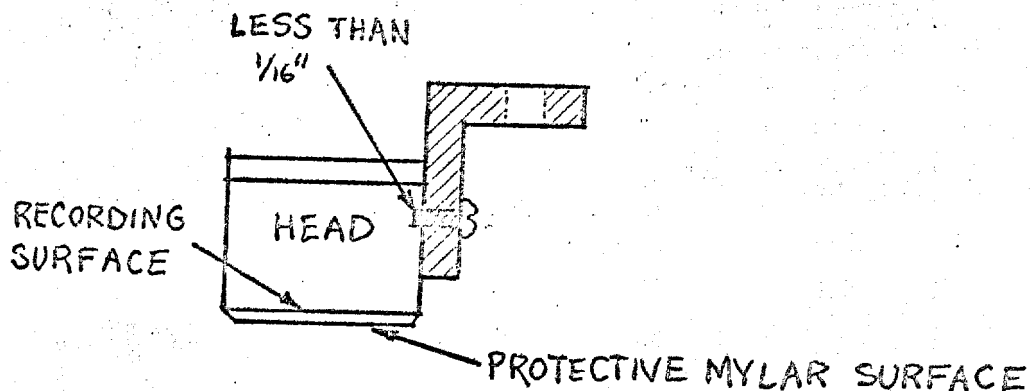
ATTACHING FLPA 200 TO MOUNTING ANGLE
